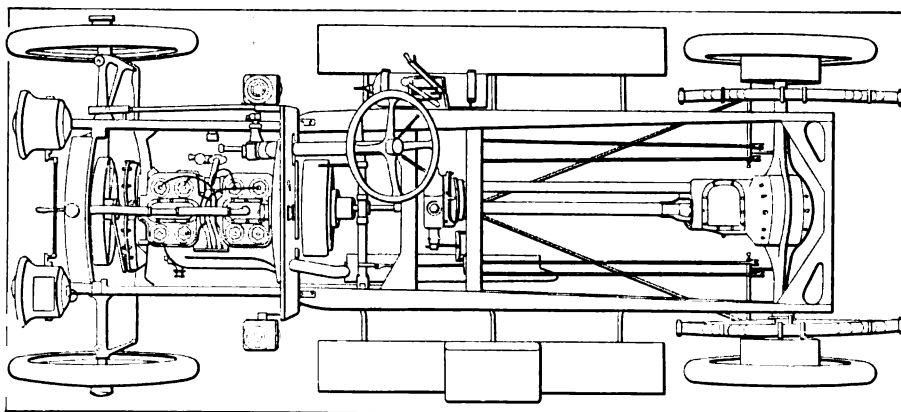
Plan view of chassis, showing the taper frame and the disposition of the working parts
